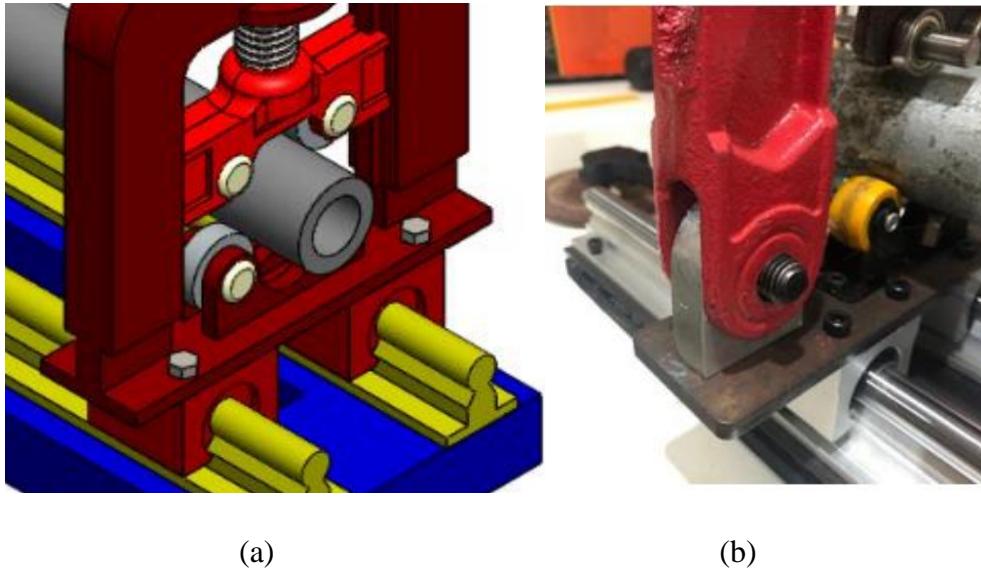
(a) Previous design clamp based, (b) fabricated clamp based.
